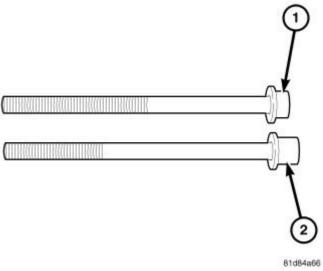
Cylinder Head Bolt Identification Courtesy of CHRYSLER GROUP, LLC
